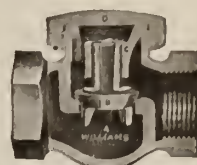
SECTIONAL VIEW OF MEDIUM REGRINDING CHECK VALVE
